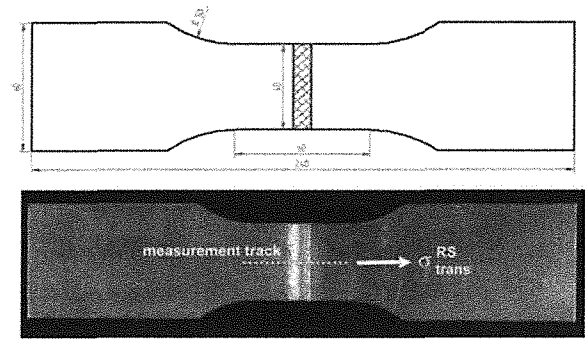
Shape and dimensions of the investigated fatigue test samples.
